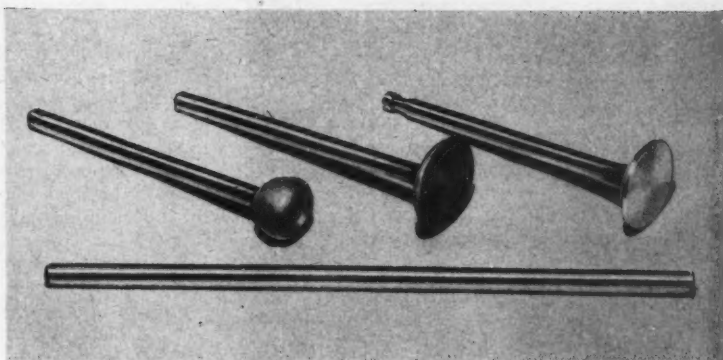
Welded and upset blanks, a forging, and a completely machined 2-piece exhaust valve as produced by Vauxhall Motors, Ltd., in a series of 17 operations with a total cycle time of slightly less than 2 min., apart from heat treatment
